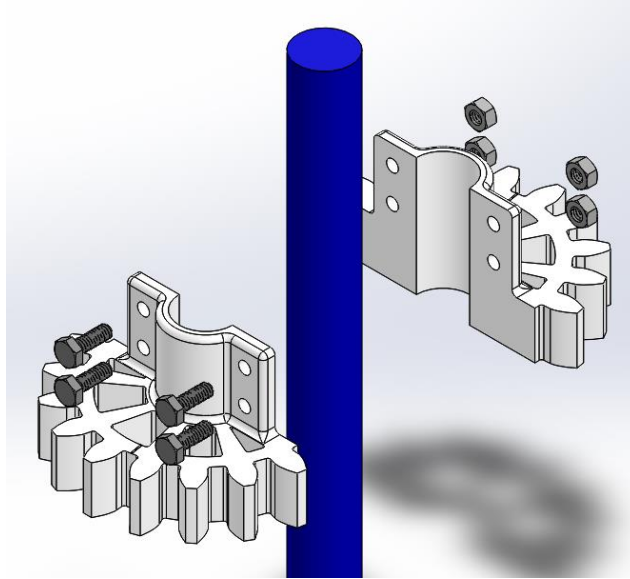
Two-part gear on trolling motor shaft, used for the revised drive system
